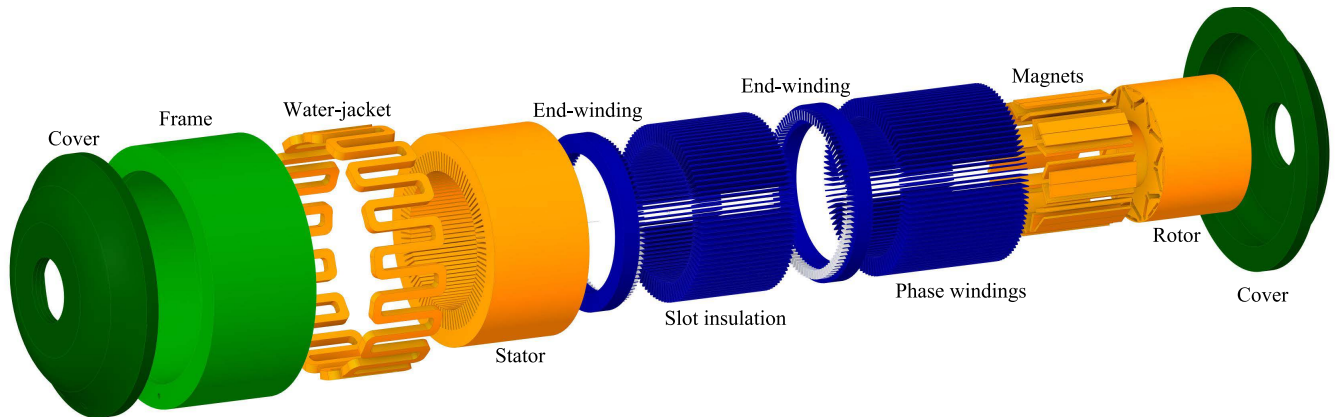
Exploded view of the IPM machine geometry with a 16-channel housing water-jacket and a simplified end-winding geometry.
